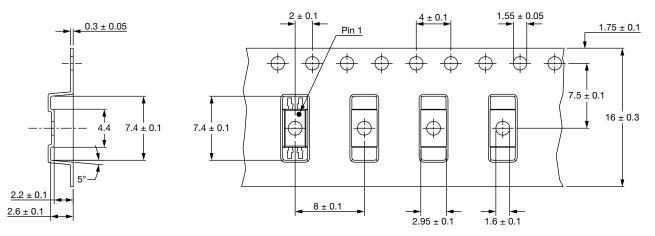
Tape and Reel Packing (3000 parts per reel)
